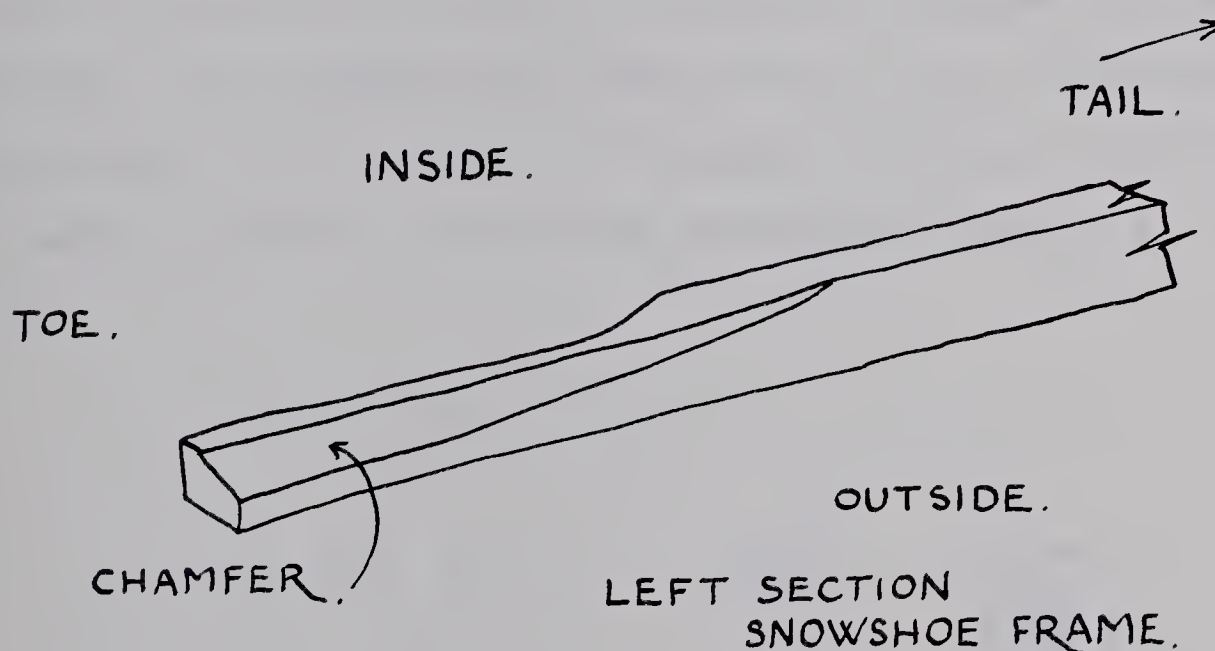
Fourth Stage of Reducing Wood Blank to a Frame, Toe Chamfer
